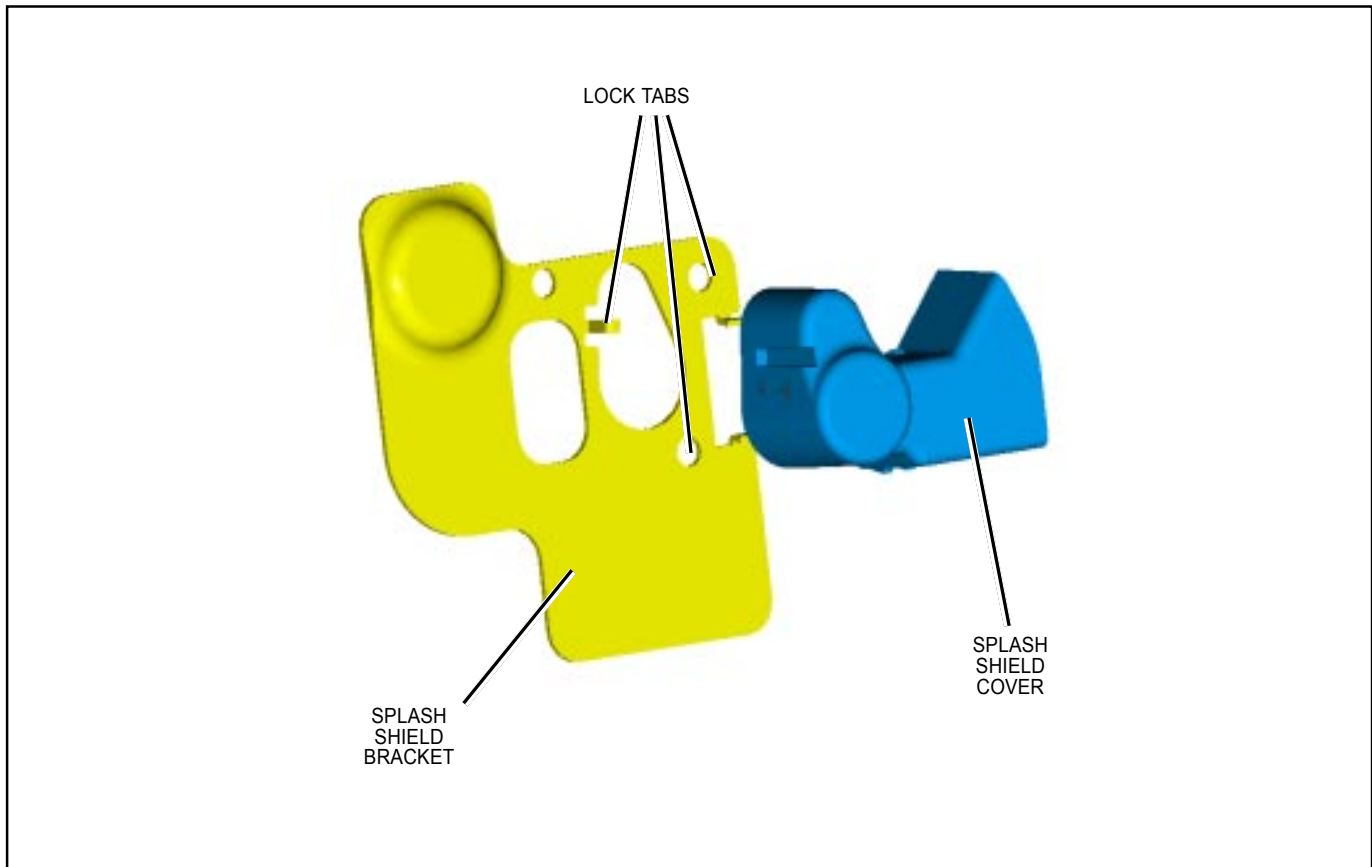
SPLASH SHIELD BRACKET AND COVER - (EXPLODED VIEW)
